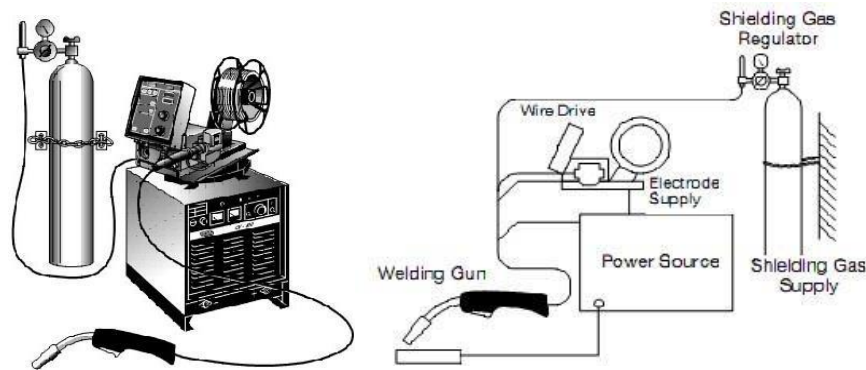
Welding machine and GMAW welding machine scheme
